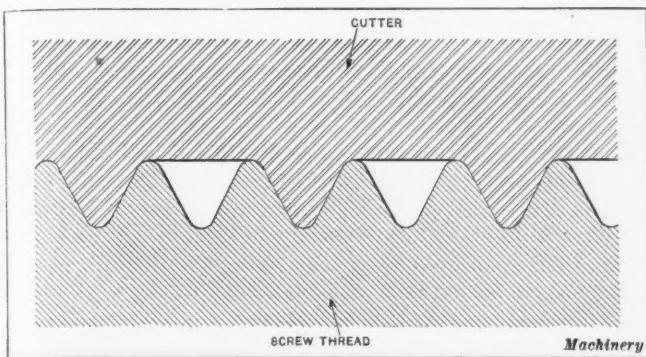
Enlarged Sectional View, showing Multiple Cutter with Alternate Rows of Teeth removed for milling Comparatively Long Screw Threads
